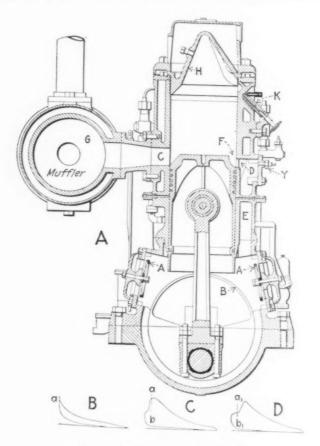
KROMHOUT HEAVY OIL ENGINE
